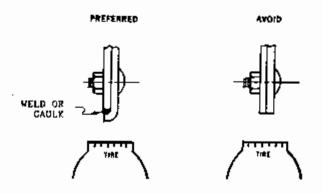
DESIGN OF SHEET METAL JOINTS EXPOSED TO TERE-THROWN SPRAY
